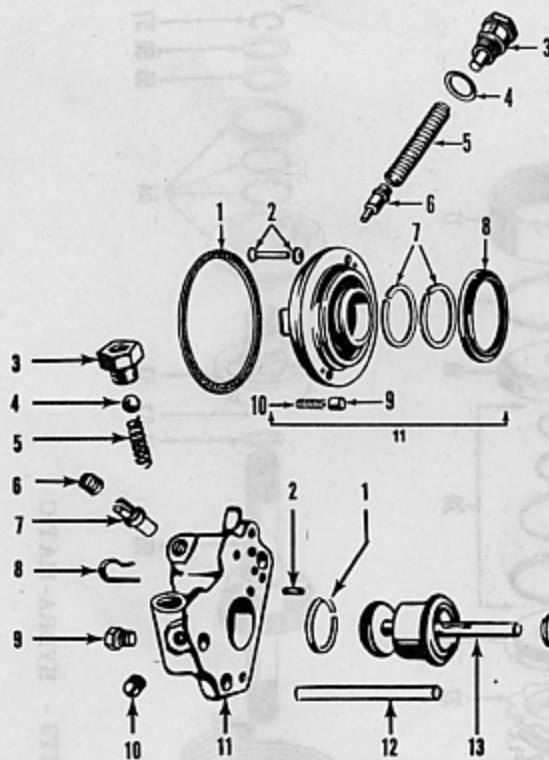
FRONT OIL PUMP - HYDRA-MATIC
